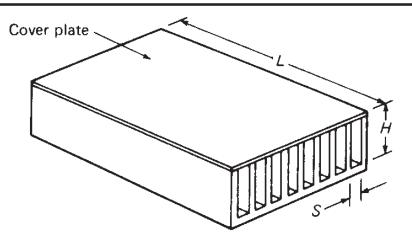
Geometry for forced convection cooled extruded heat sink.
